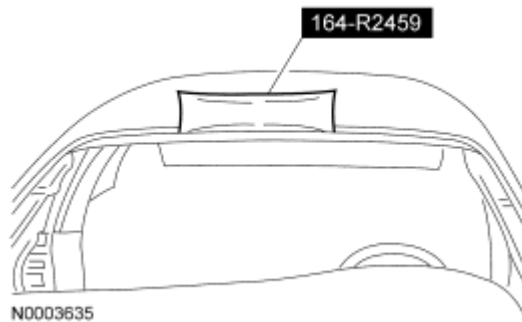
Using Special Tool (164-R2459), Distance The Windshield From Body
